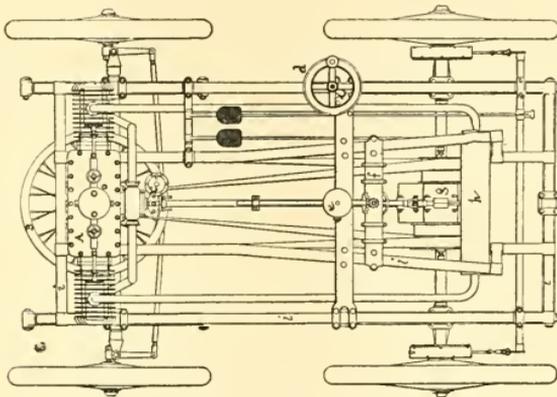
PLAN OF THE TURGAN-FOY VOITURETTE.
